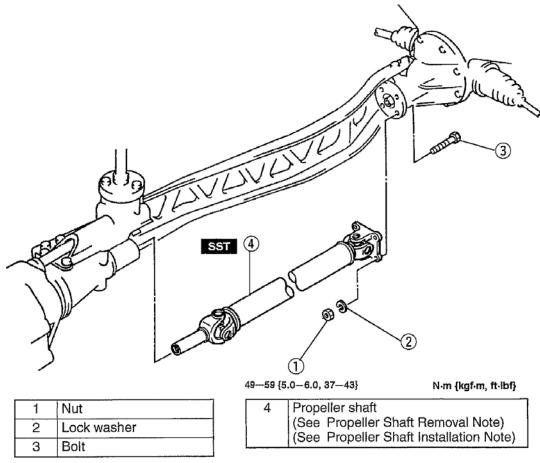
Identifying Propeller Shaft Location Courtesy of MAZDA MOTORS CORP.
